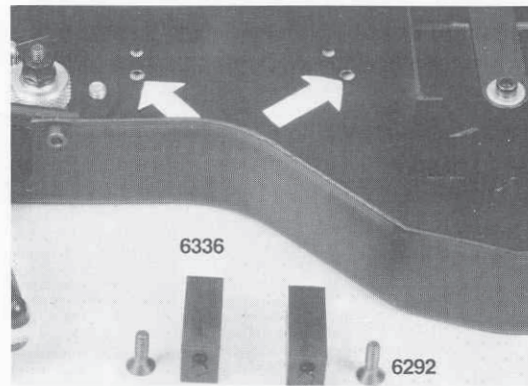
, 129a, 130 & 131 1) Remove the two #6336 nylon servo mounting blocks and two #6292 4-40 x 3/8" flat head socket screws (also in bag #8-6). 2) We are going to mount the servo blocks to the chassis, which will involve some measurements on your part. The mounting hole in the one end of the block is offset so we can adjust the mounting position for different servos. See fig. 129. Measure the servo from the back of the mounting tabs to the end of the servo. If the distance is 1.0" or less, mount the blocks so that the major portion is toward the passenger or right side). 3) If the measurement is greater than 1.0" then mount the blocks so that more of the block is toward the driver's or left side. 4) Next we must drill a hole in each block in the proper place to secure the servo. Now line the blocks up parallel and place the servo between the mounts, making sure the output shaft is towards the rear of the car (fig. 131). Center the servo between the blocks and mark the center of the two top mounting holes on the servo using your X-acto® knife.
